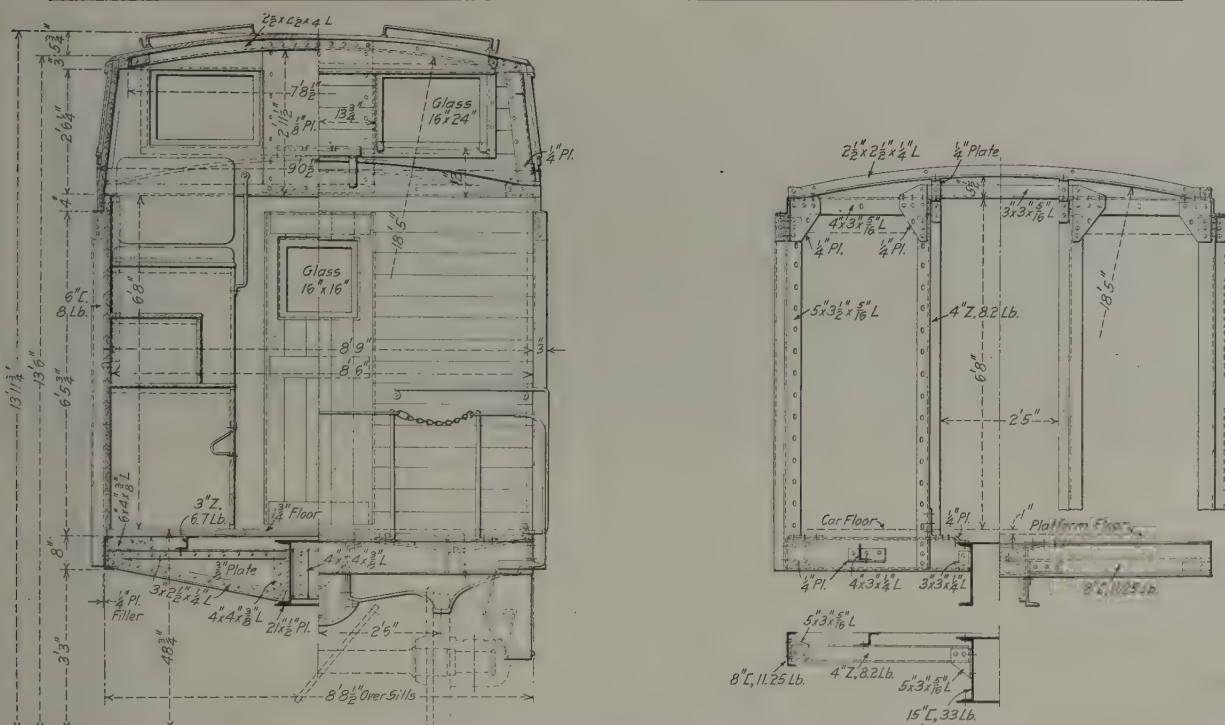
Cross Section and Half End View of Caboose Car Shown in Figs. 261-267.
